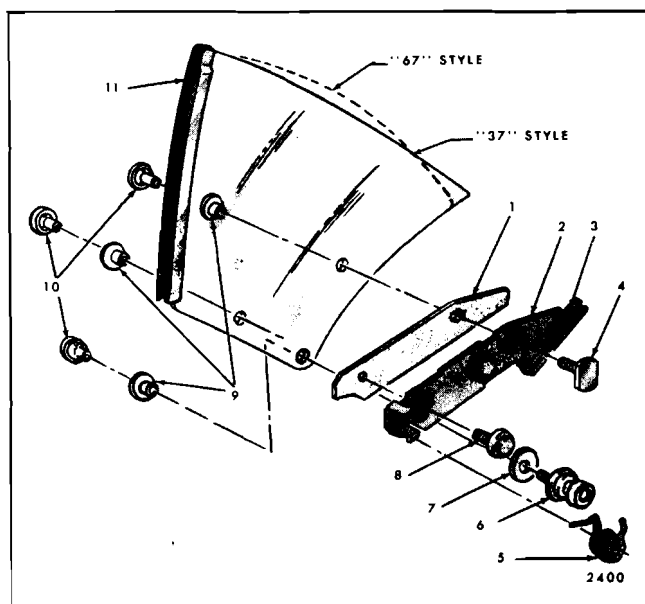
Rear Quarter Window Assembly - "F" Style
